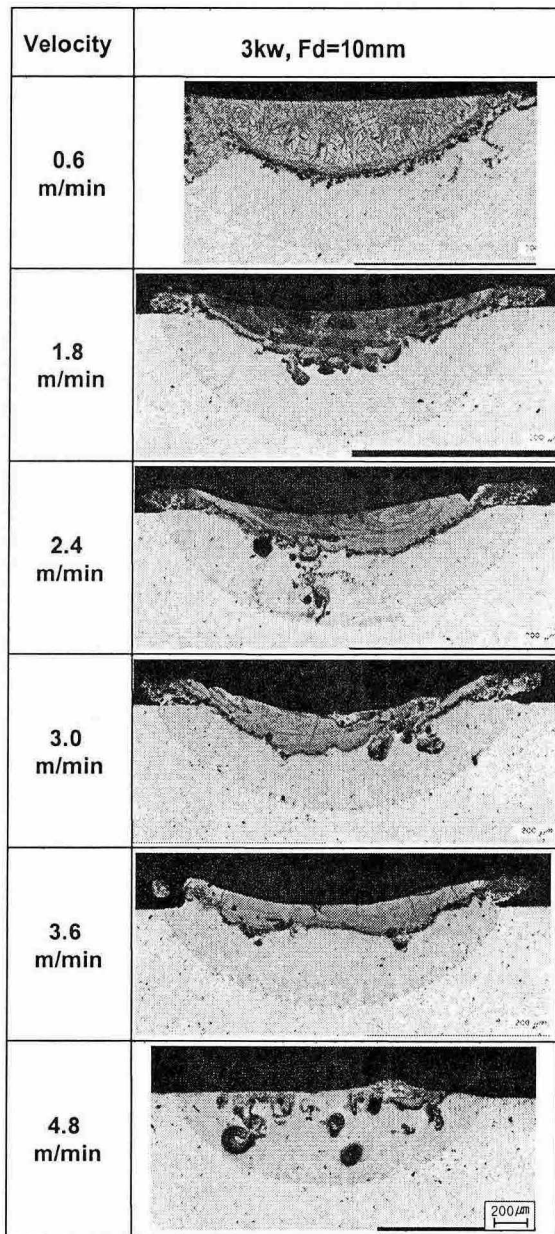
Change of reaction layer with a welding speed under 3kW
